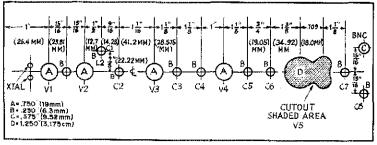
Dimensions for locating holes for tube sockets and variable capacitors. The spacing between V3, V4, and V5 is critical and should be followed closely. Double-sided pc board is used as a chassis base.
